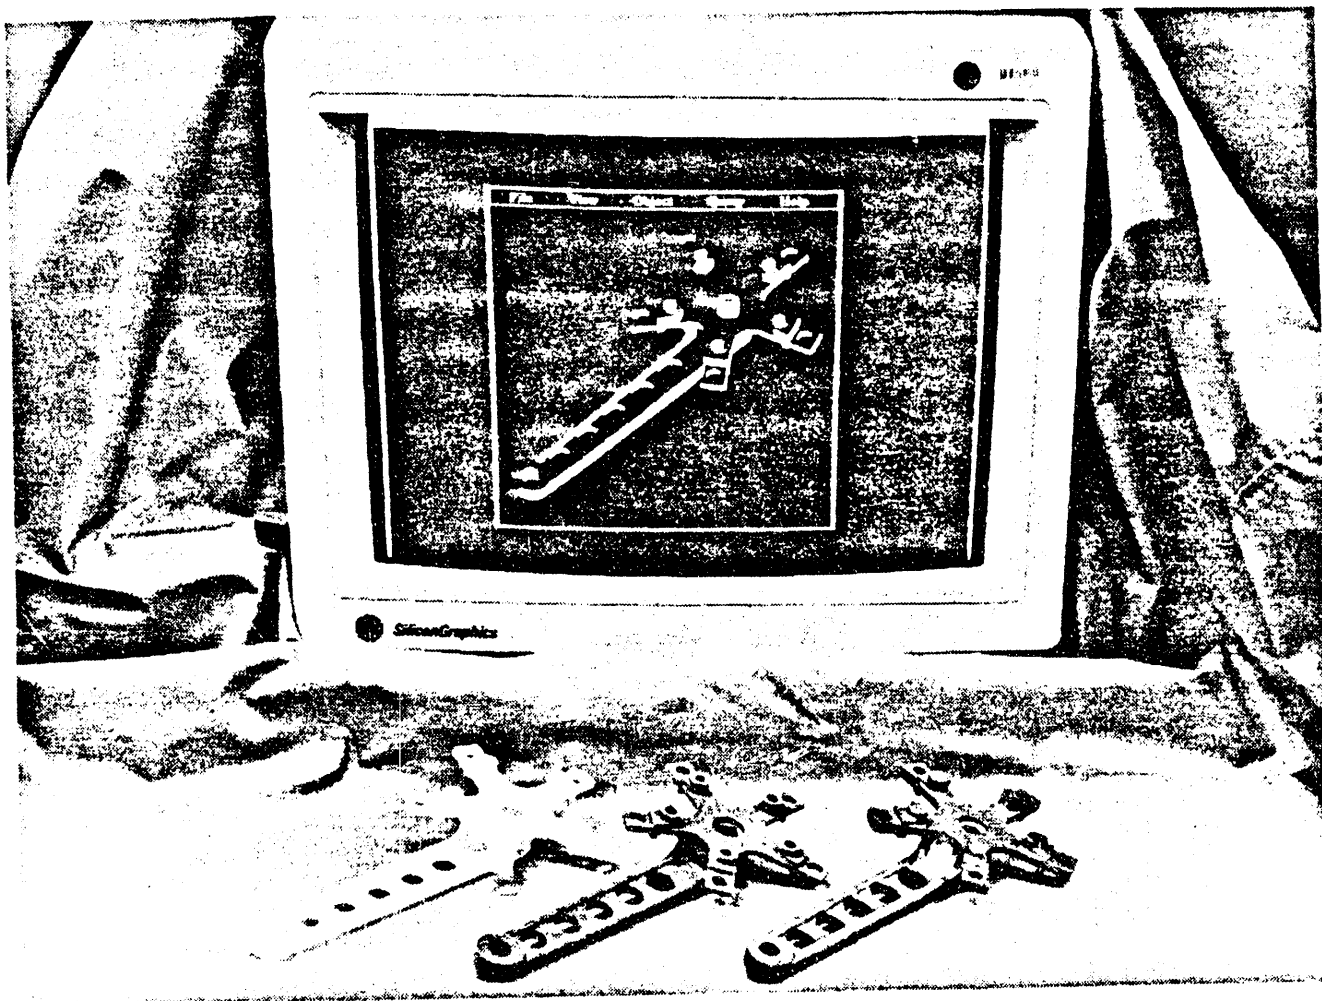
(Top) Three Dimensional CAD Solid Model. (Bottom Left to Right) Acrylic Fit-Check Model fabricated on Stereolithography SLA-250, Wax Pattern fabricated on Sinterstation 2000 Beta SLS Machine, and Titanium Cast Part.
